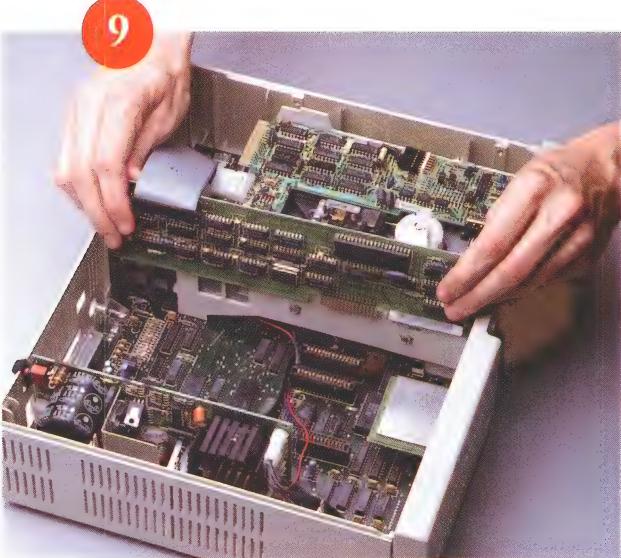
The PCjr has three expansion slots on its motherboard. The slot next to the disk drive is dedicated to the disk drive controller board. Plug the controller board into this slot, but be sure that the board is not crimping the disk drive power cable or fan cord. The controller board, like the two other IBM expansion boards, has notches that provide safe passage for these wires.
